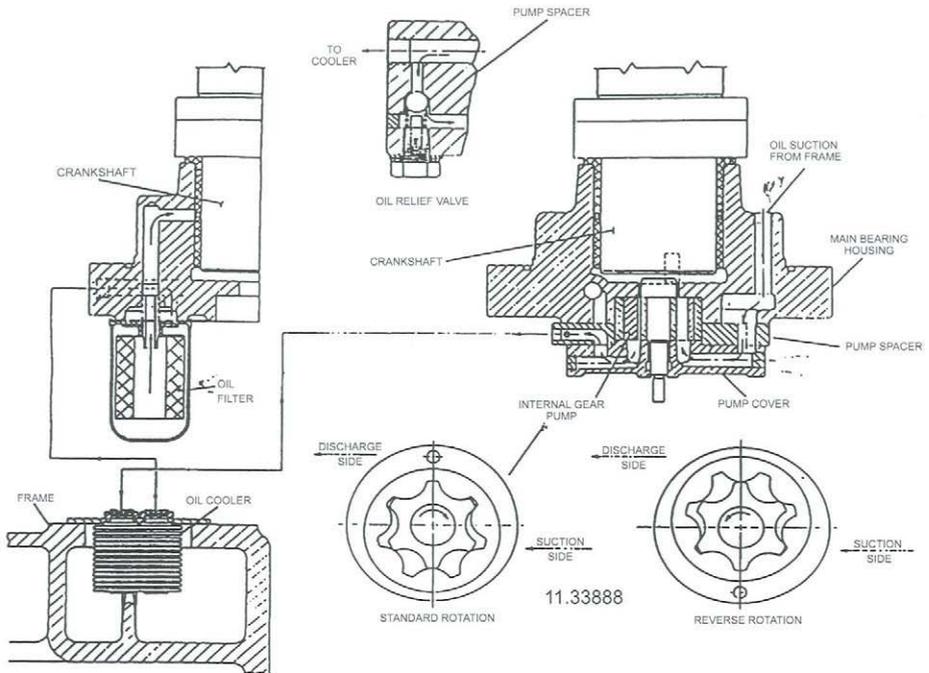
HDS off-gas-lube oil system (Courtesy of Dresser Rand)
